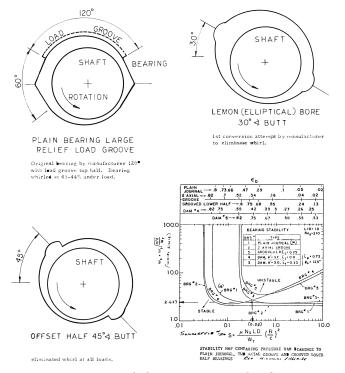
Summary of Three Bearings Employed in Correction. Original axial groove by turbine OEM, lemon bore by OEM, offset half bearing by user.
